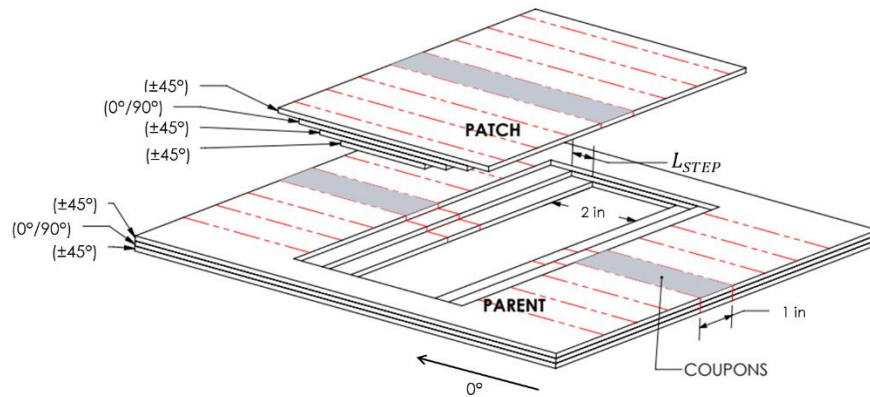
Configuration of the manufactured plates and the cutting of the specimens from the plates.
